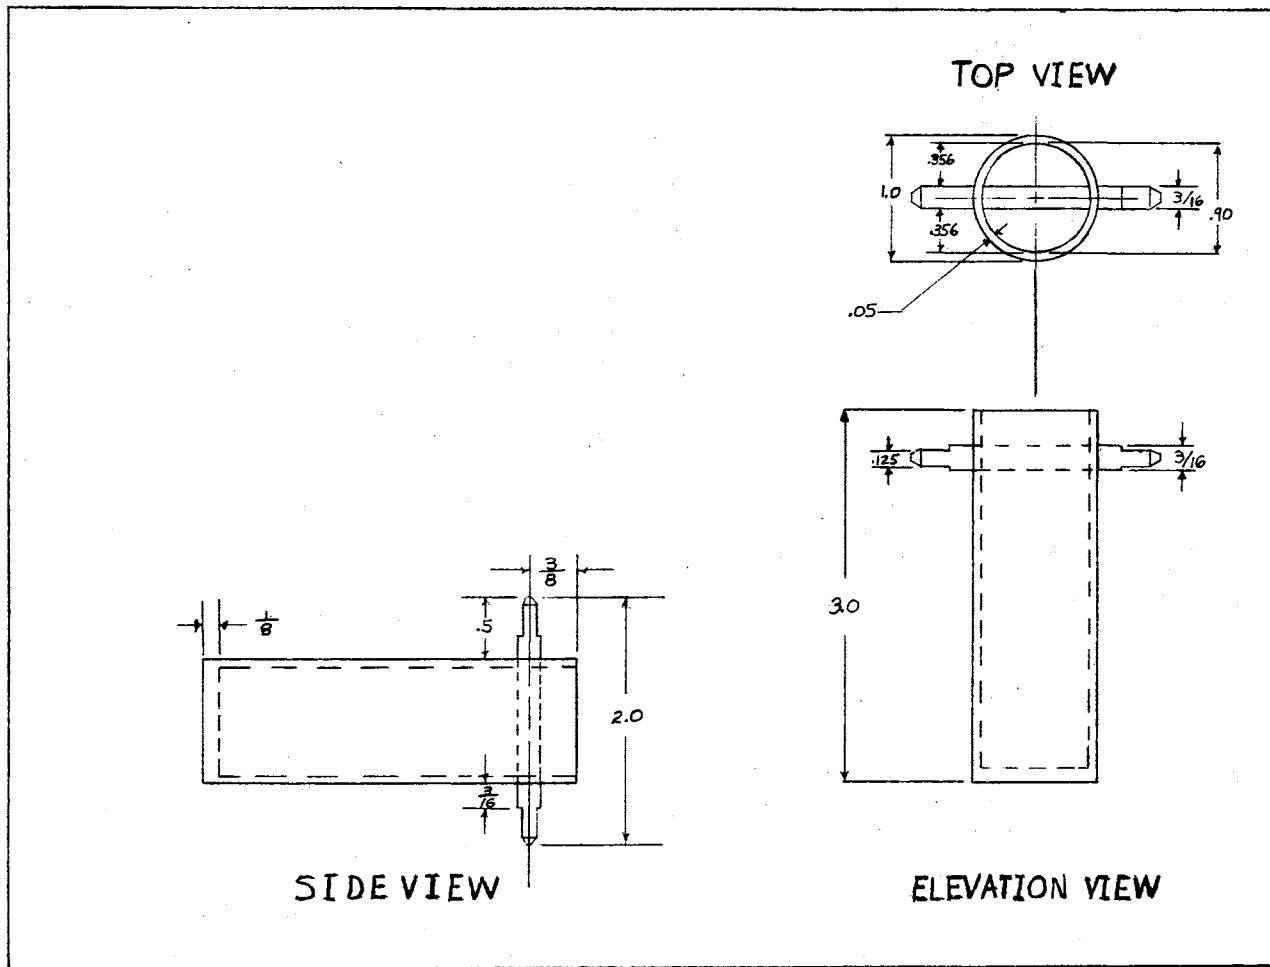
Detailed Dimensioned Drawing of the 25 ml Evaporative Dosimeter Cup
